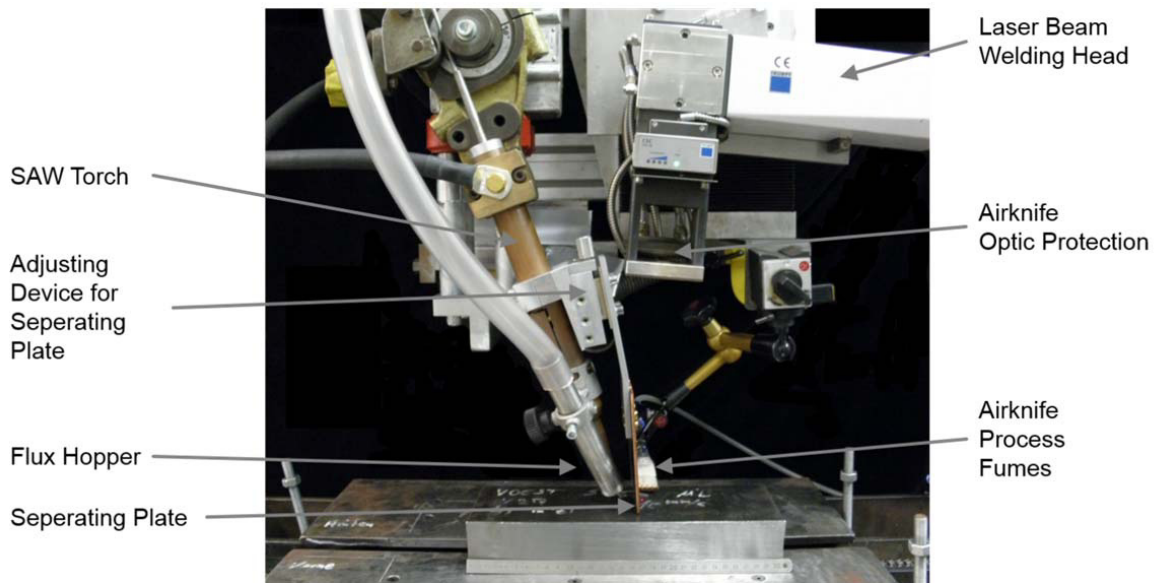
Laser Beam Submerged Arc hybrid Welding (LB-SAW) setup with solid-state laser.
